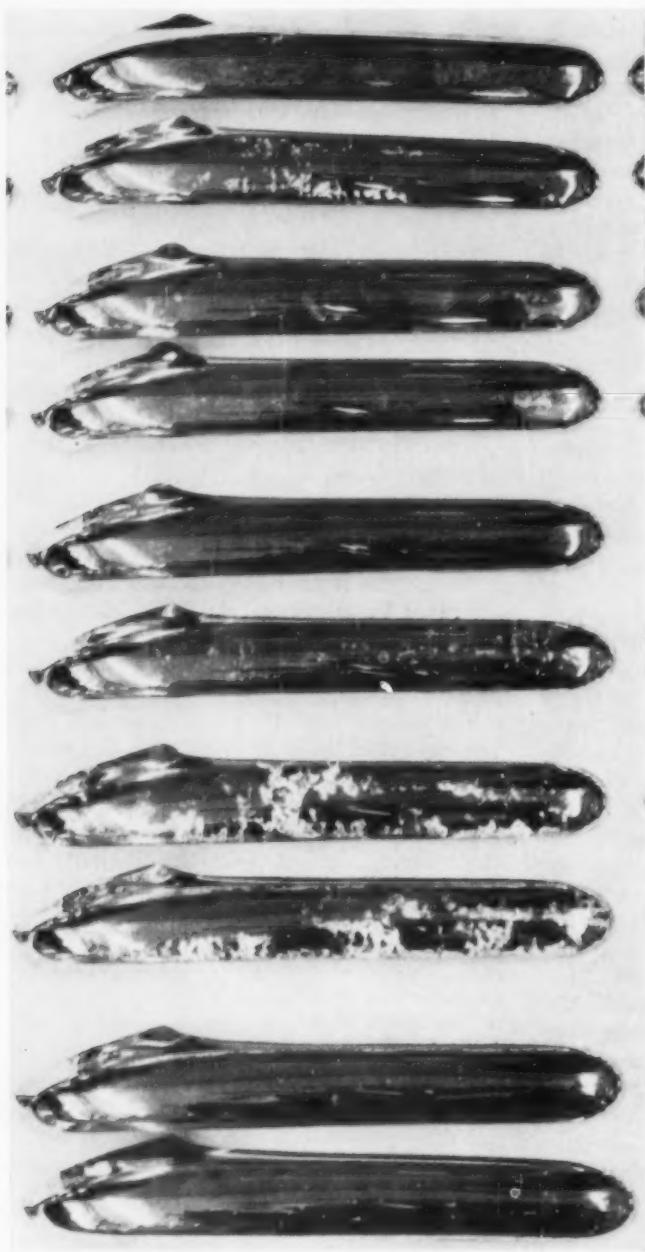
Corrosion Tests on Bright-Plated Zinc Die Castings Using Regular Nickel
